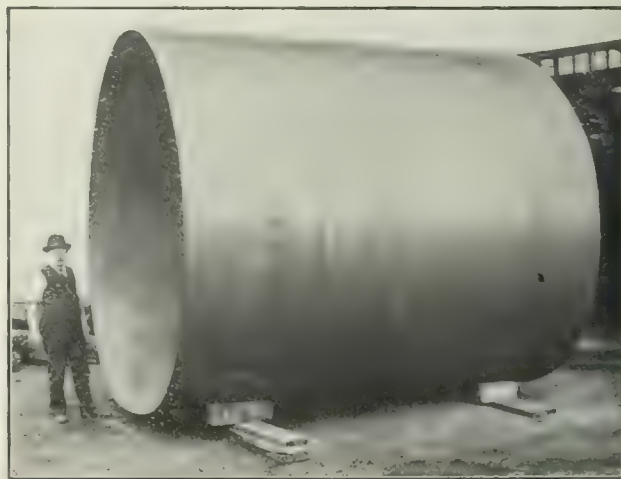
An 11 Ft. Lap Welded Steel Drum.
